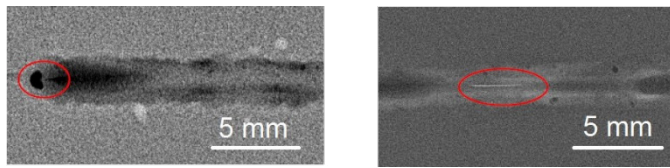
X-ray images at the end of a laser beam welded plate; (a) end crater hole at a switch-off of the laser power; (b) solidification crack in the case of a laser power ramp-down
